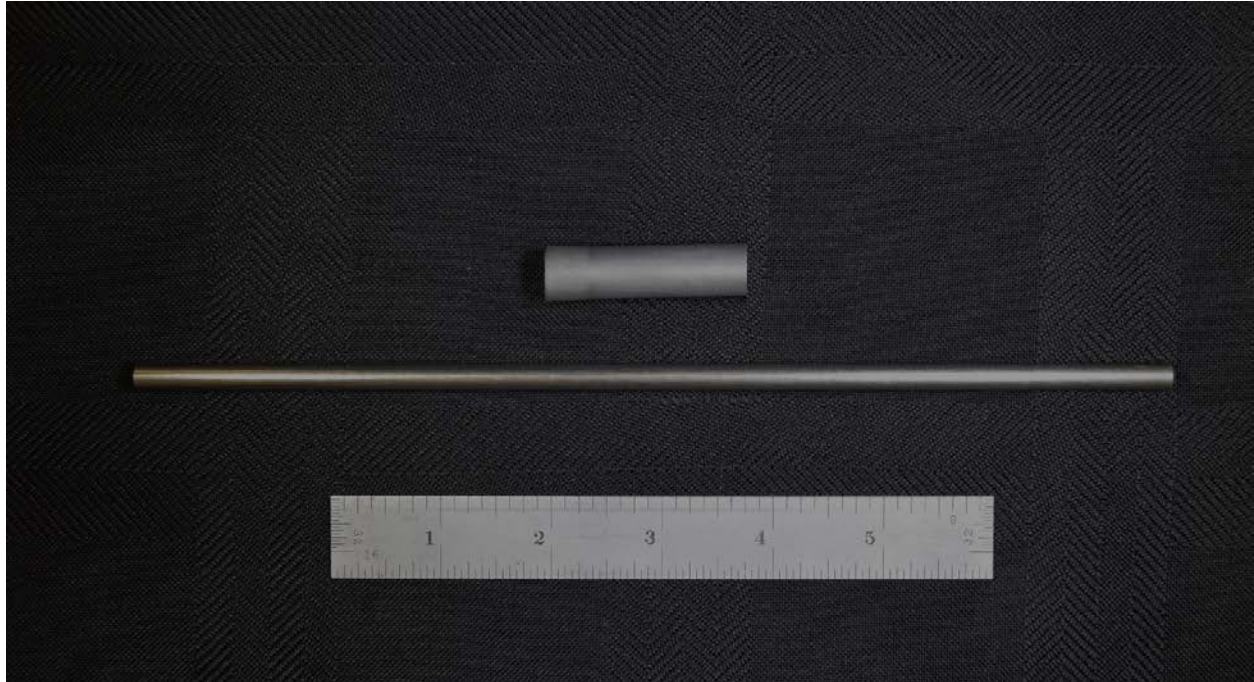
Photograph Showing MA956 Starting Blank (top) with Finished MA956 Thinwall Tube (bottom)
